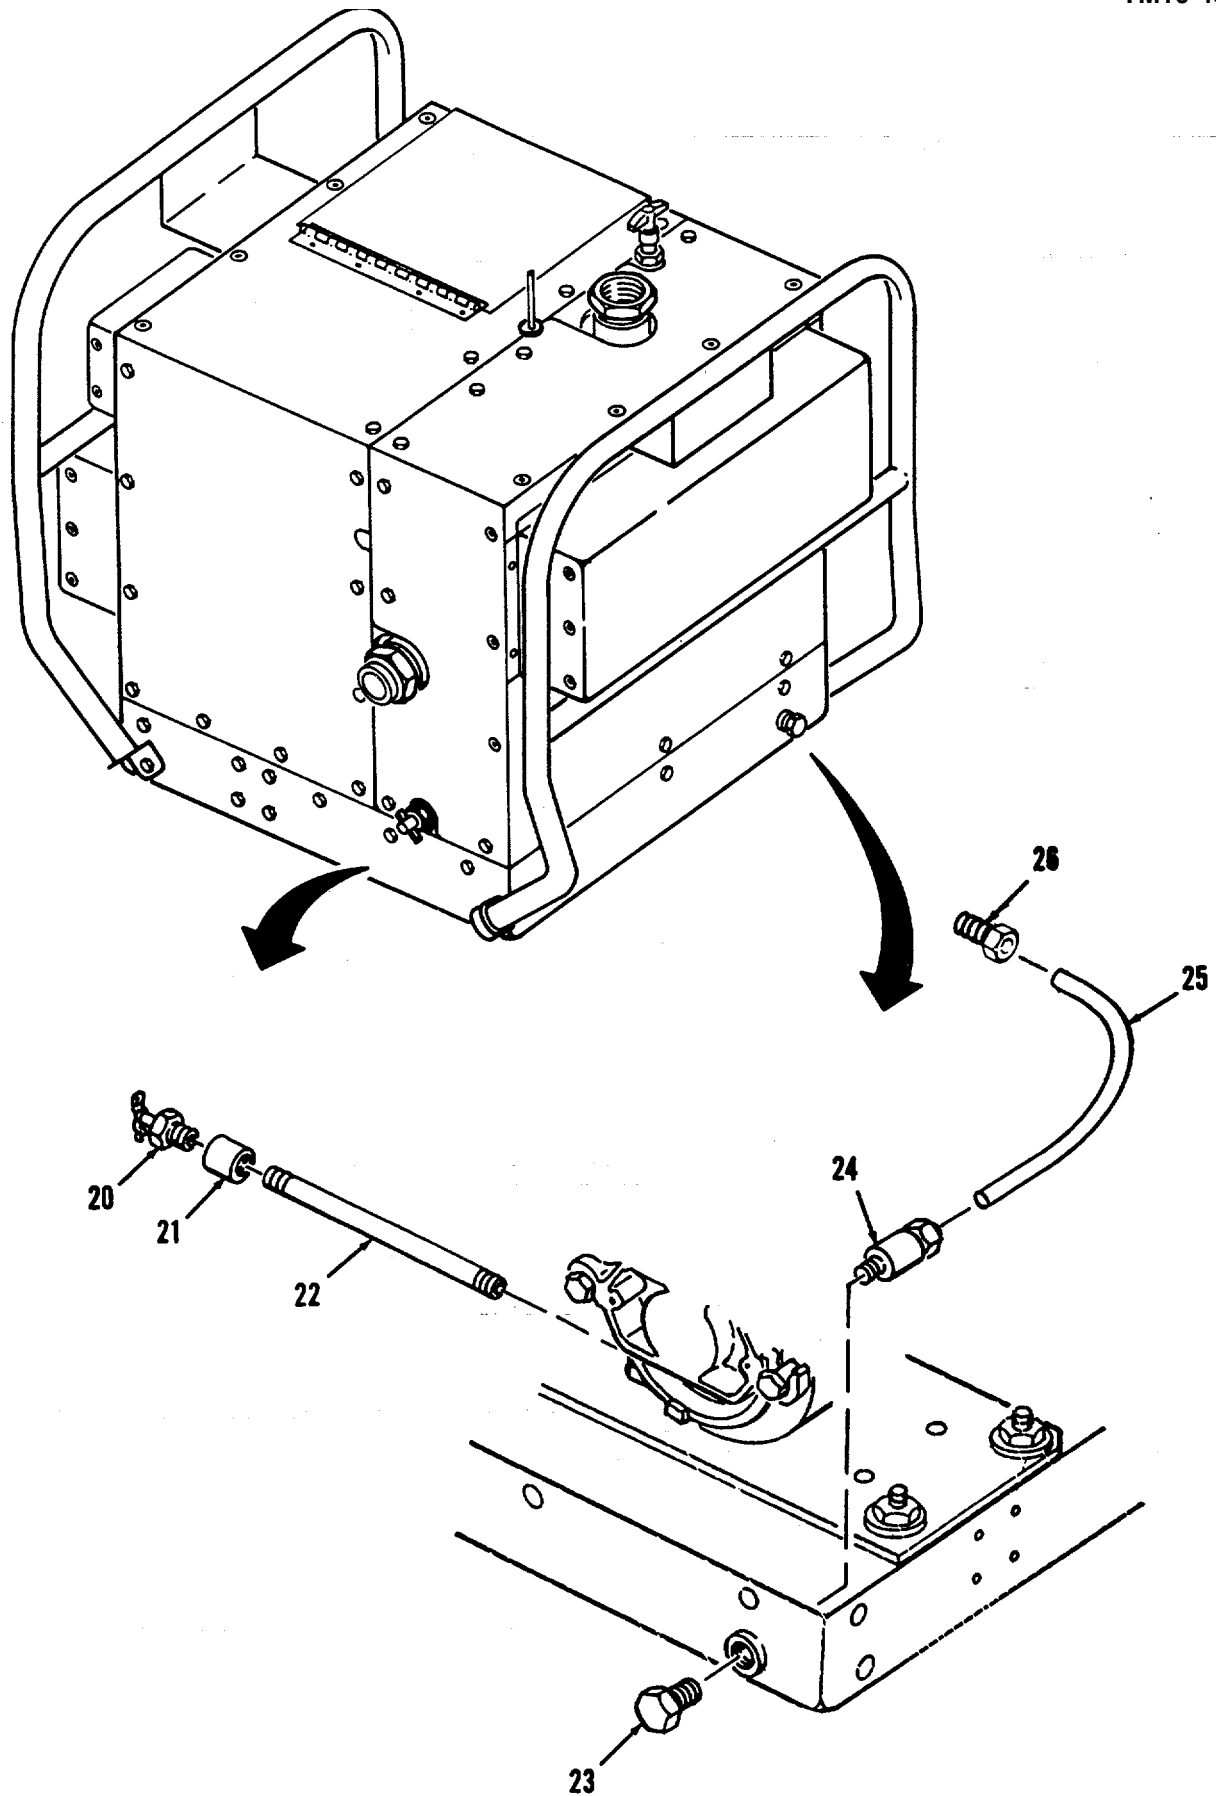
Enclosure Assembly (Sheet 3 of 4)
